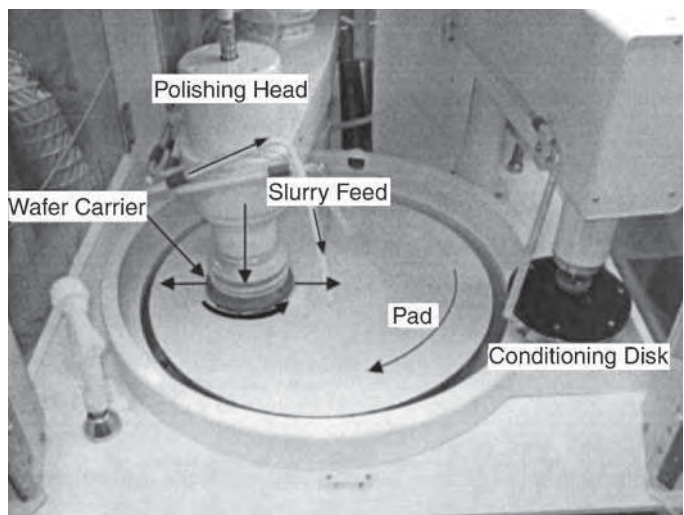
Photograph of CMP tool. Reprinted courtesy of the University of Edinburgh
